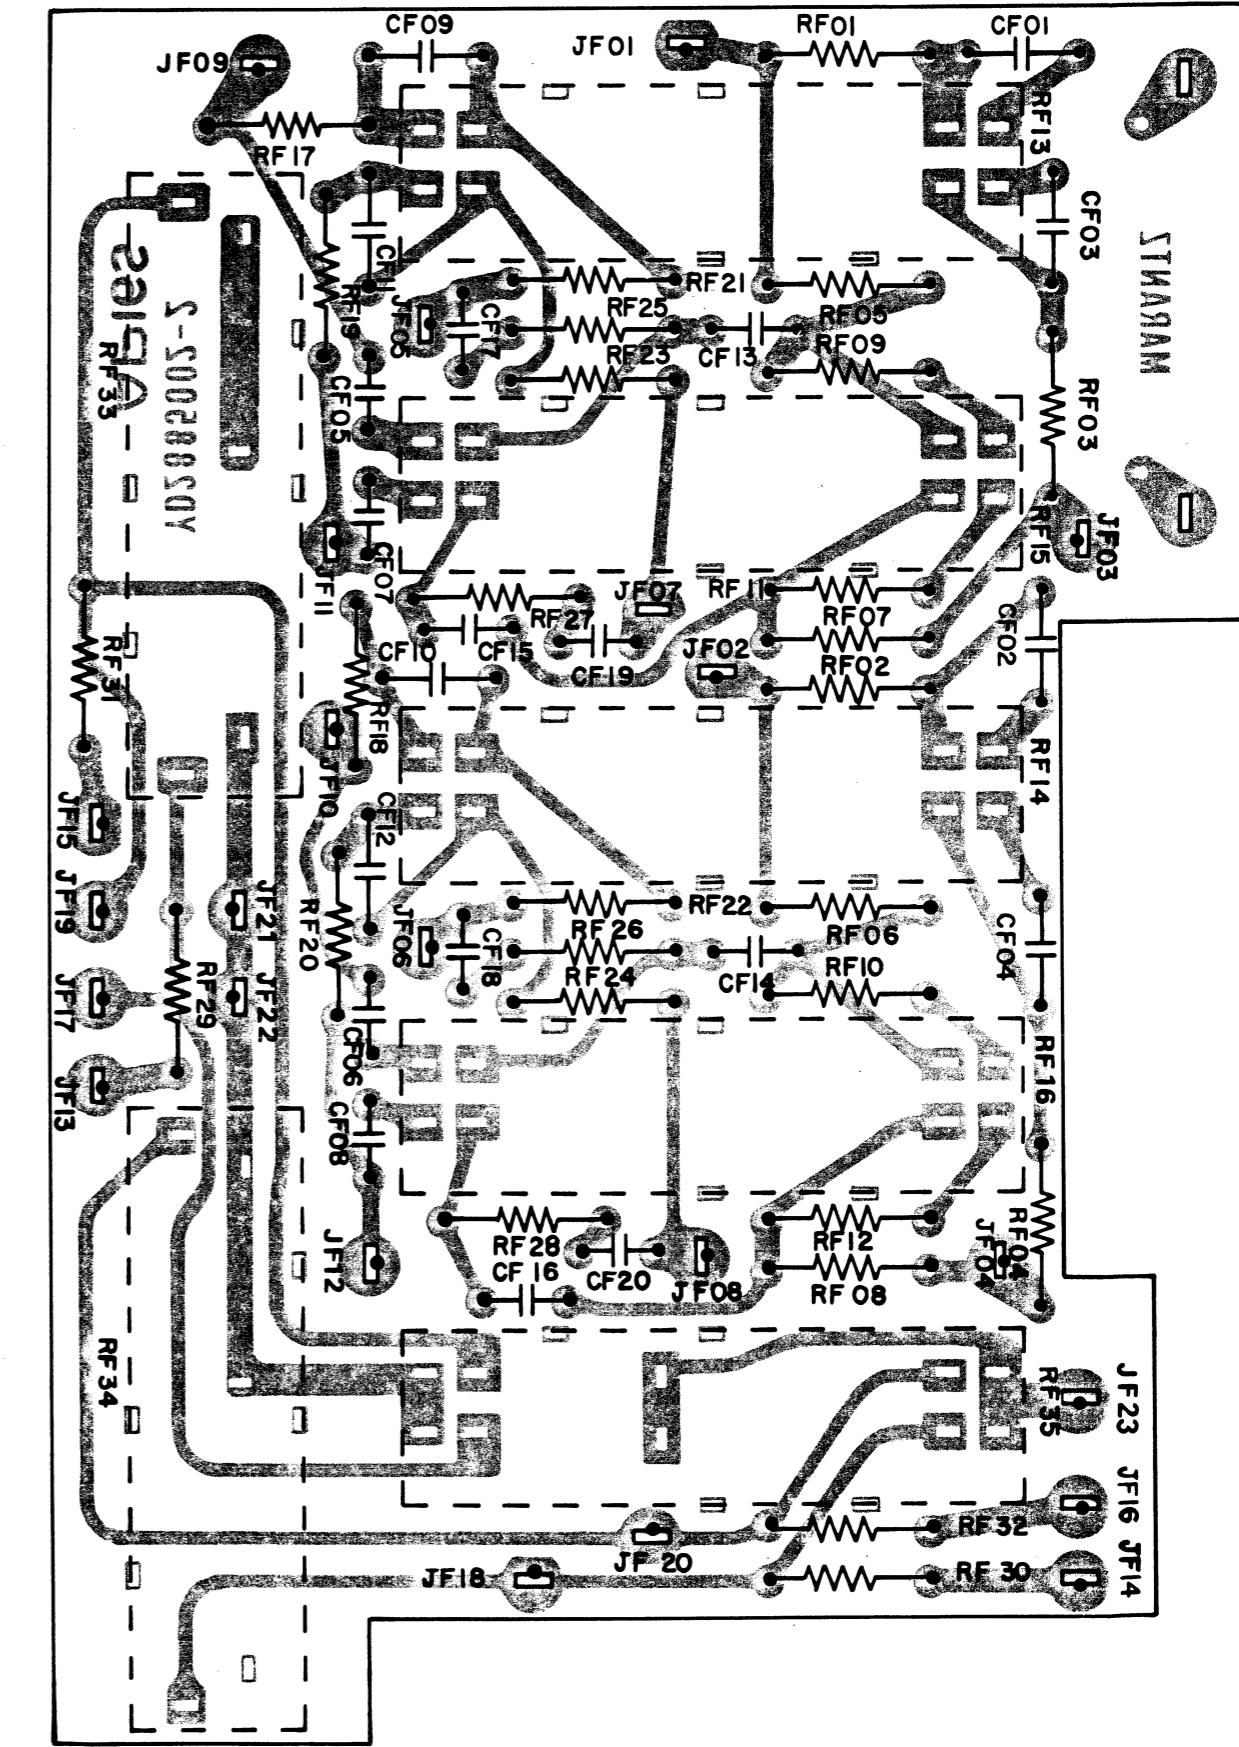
Tone and Balance Control Unit Assembly PF01 Component Locations
